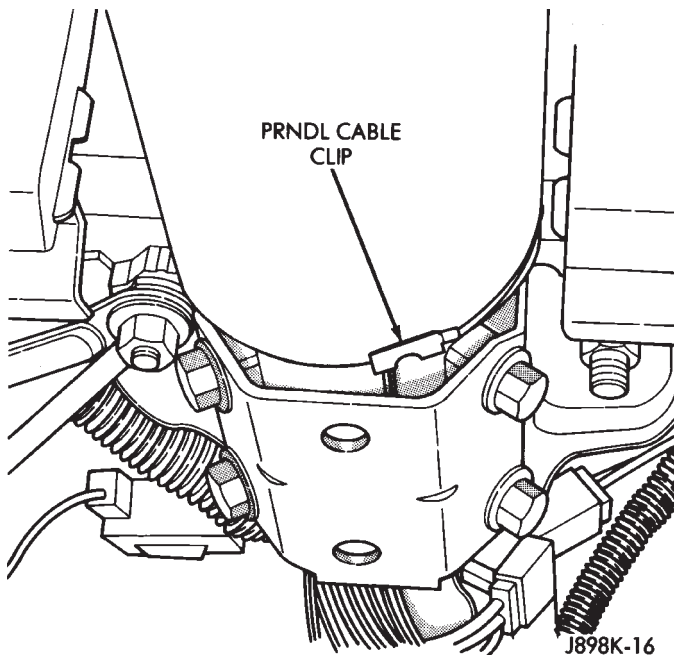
Instrument Housing Removal/Installation—YJ
